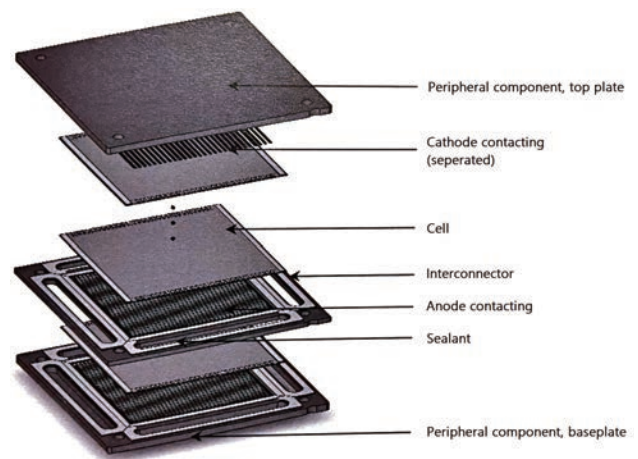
Explosion view of a planar, bipolarly assembled stack.^[1]
